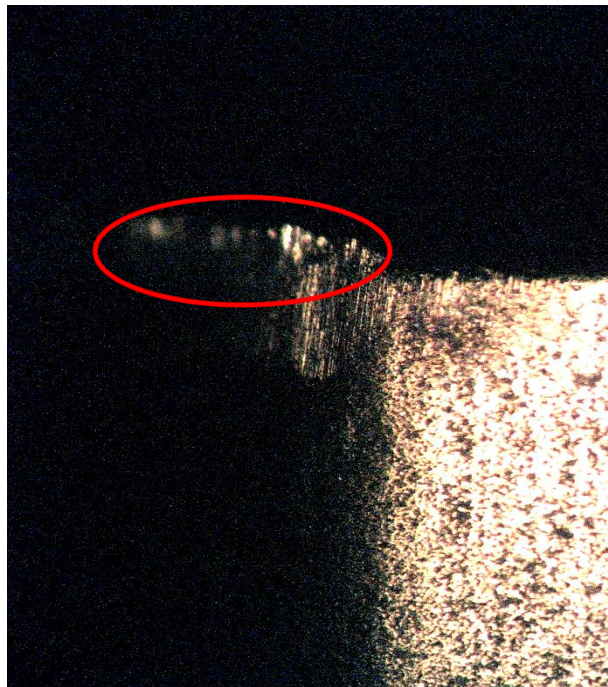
A sample photograph of built up edge taken in electromagnetic cutting condition at 530 RPM and 0.5mm depth of cut
